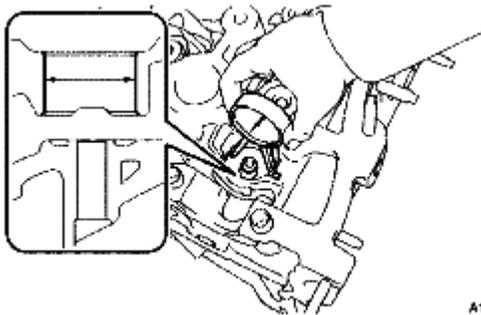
Measuring Lifter Bore Diameter Of Cylinder Head
